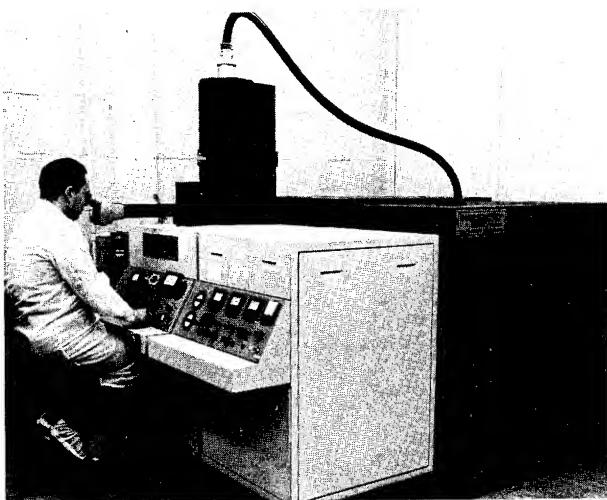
Hamilton-Zeiss electron beam welder.
